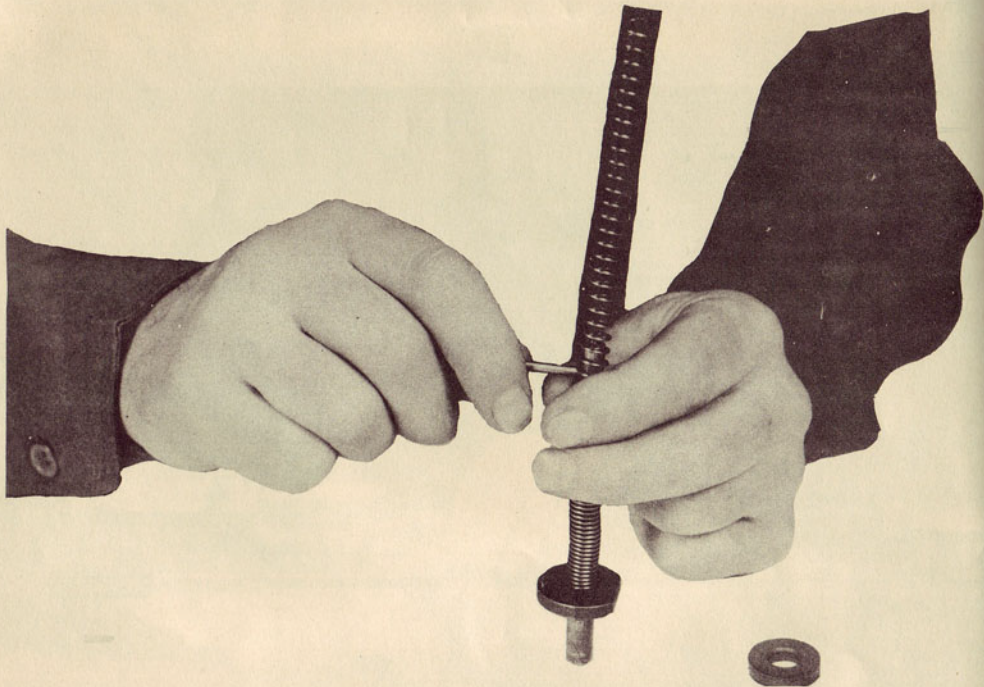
Compress RECOIL SPRING on PILOT and retain it with a nail inserted thru hole. It is not necessary to fully compress the spring; if three or four inches are free it will be adequate. Make certain that the nail is inserted from the side opposite the flat-milled portion of the BUFFER; otherwise the assembly can not be replaced in the receiver.
